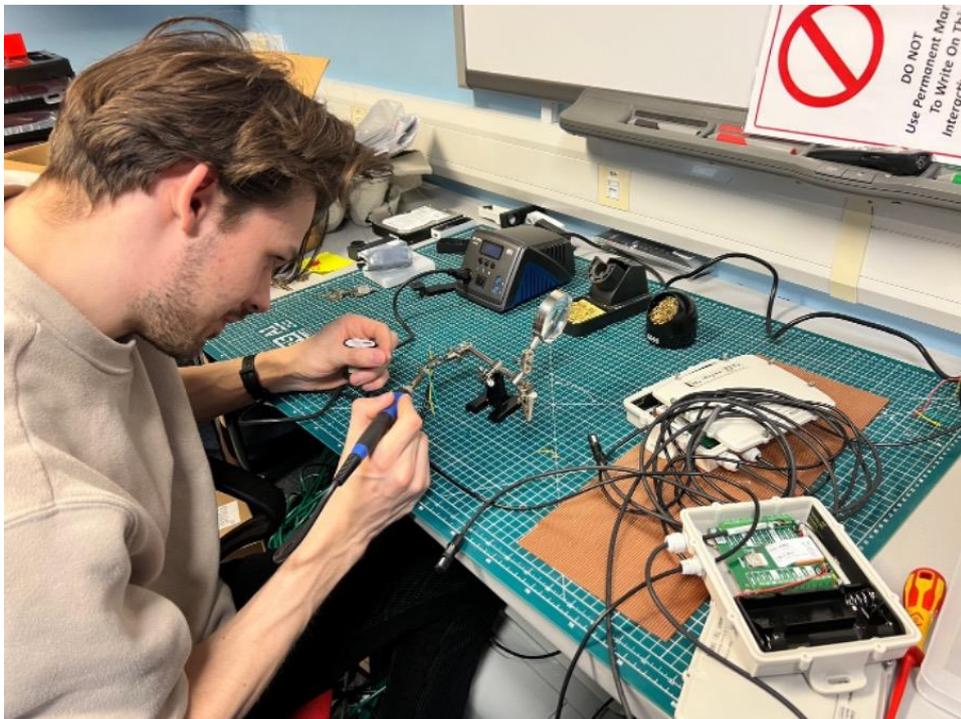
adding the hook up wires to the 2119 using a soldering iron.
